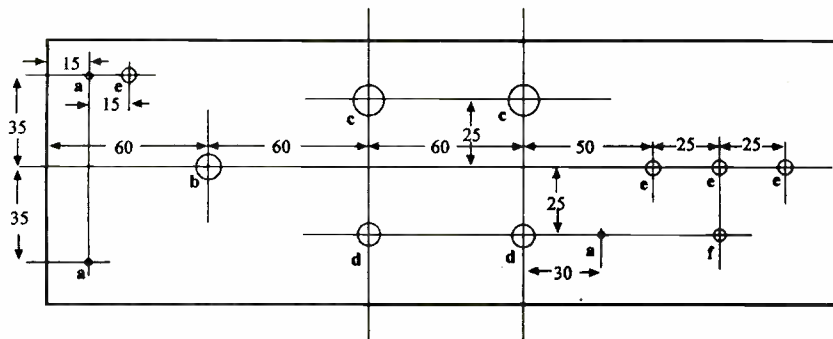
Drilling details for the front panel. All dimensions in mm. Holes a 3mm for LEDs, b 10mm viewing hole for ballast lamp, c 12mm holes for input and output on/off switches, d 9mm holes for threshold control potentiometers, e 6mm holes for miniature toggle switch and input/output/0V terminals, f 5mm hole for case earthing terminal.
